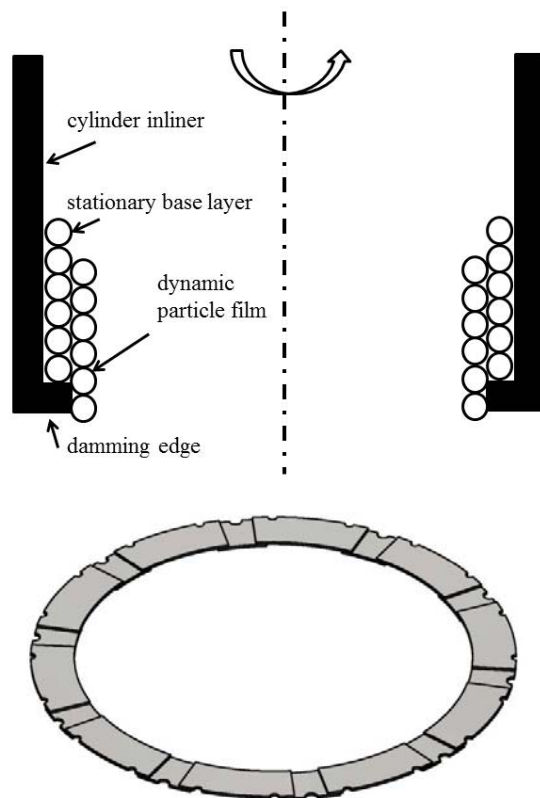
PRINCIPAL OF FUNCTION OF DAMMING EDGE AND DRAWING
